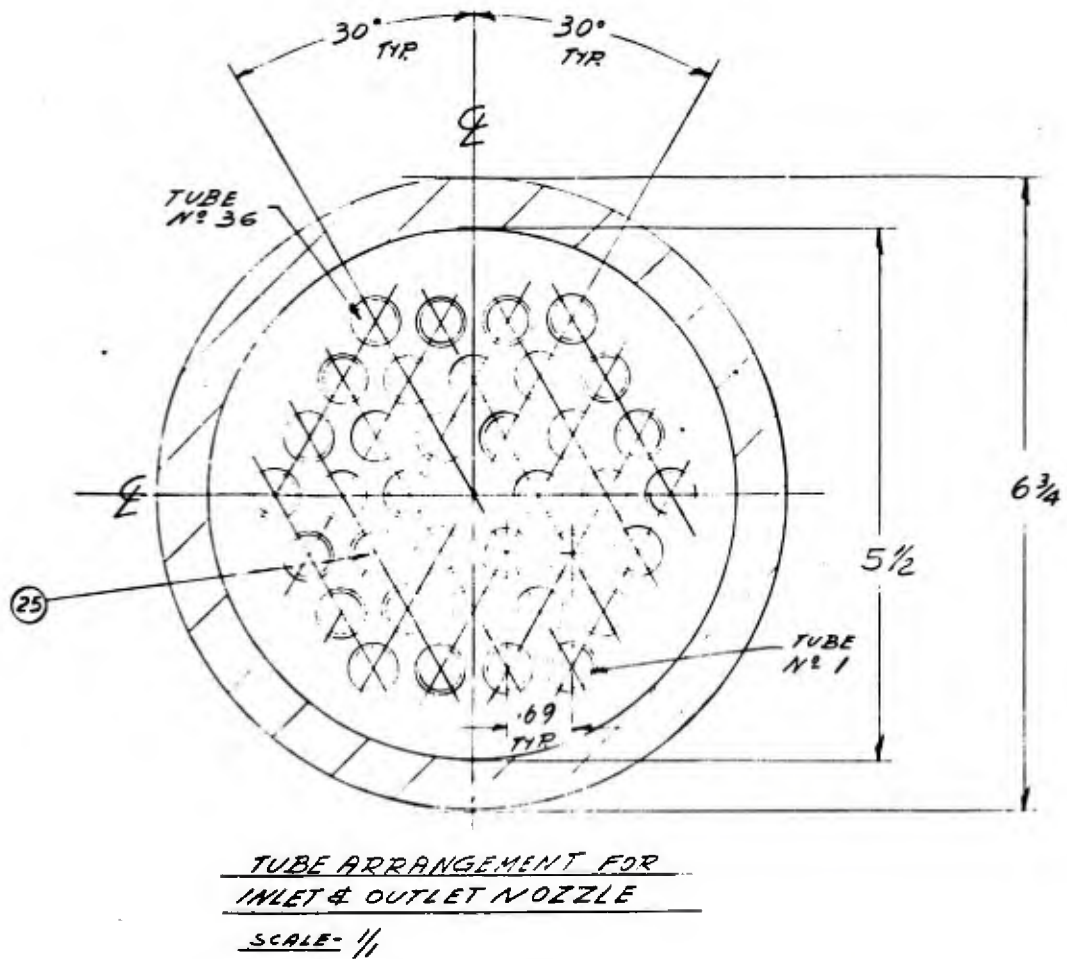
Tube arrangement for inlet and outlet nozzle
